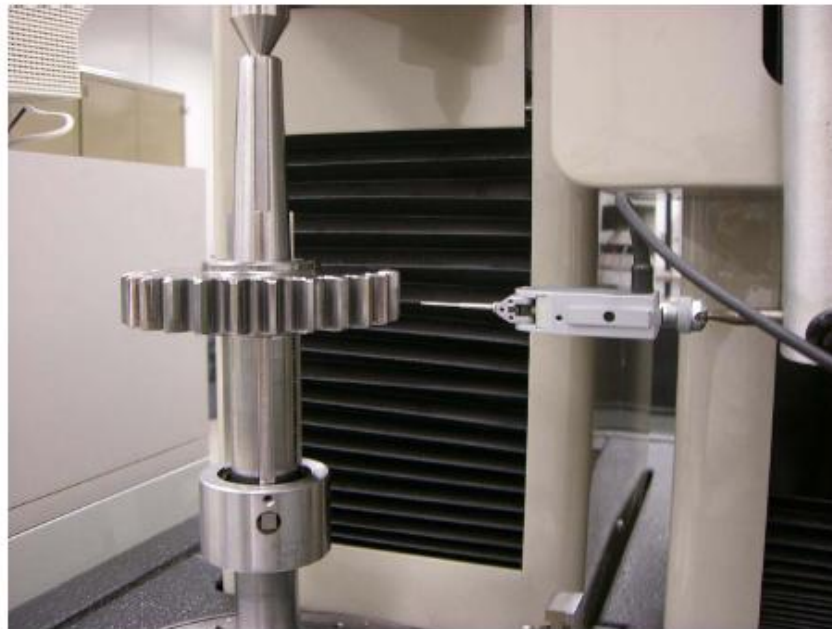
Measurement of a test gear's profiles on a gear CMM (6).
